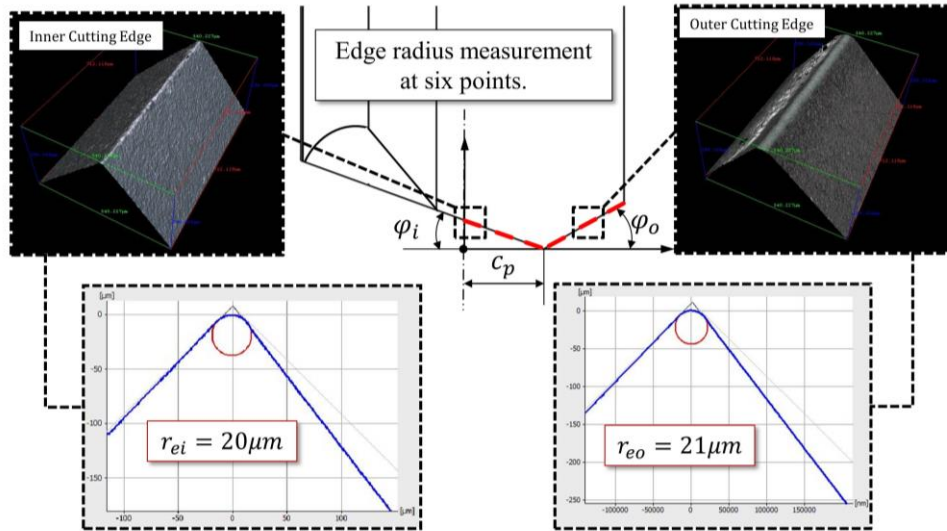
Sample measurements of cutting edge radii at inner and outer cutting edges for the honed drill.
